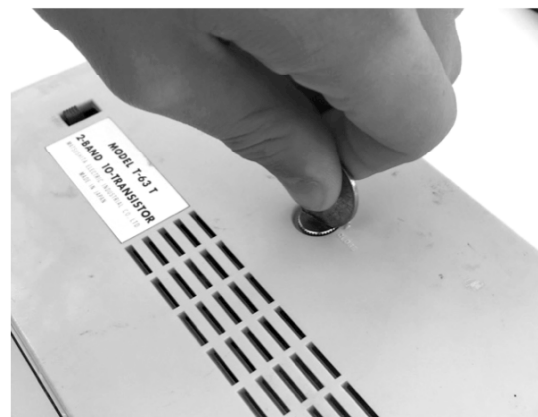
1960s National Panasonic radio. Single slot head fastener, no tool is required for primary disassembly.
